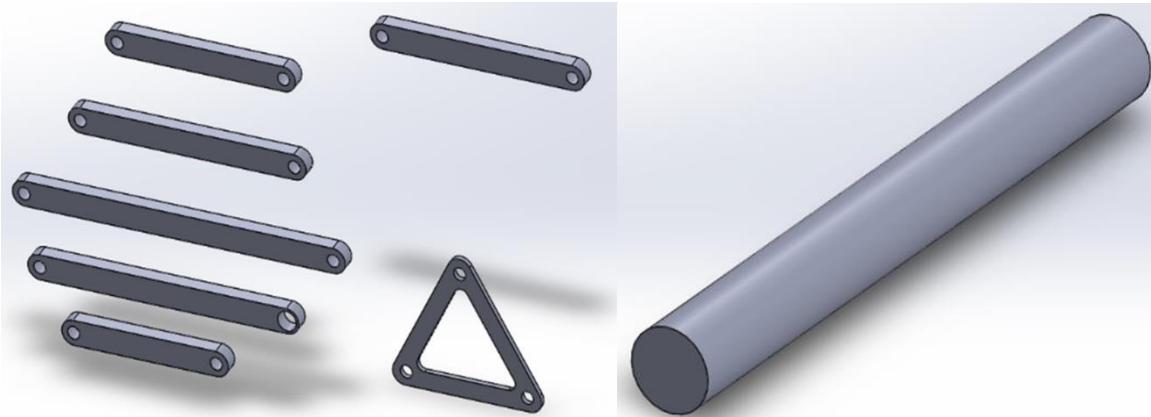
CAD Models of triangle-shaped link, straight links and shaft unit
